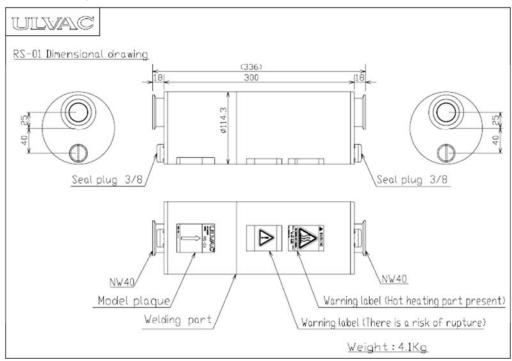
RS-01Dimensional drawing (LR60, LR90, LR300, LR600, LR1200)
